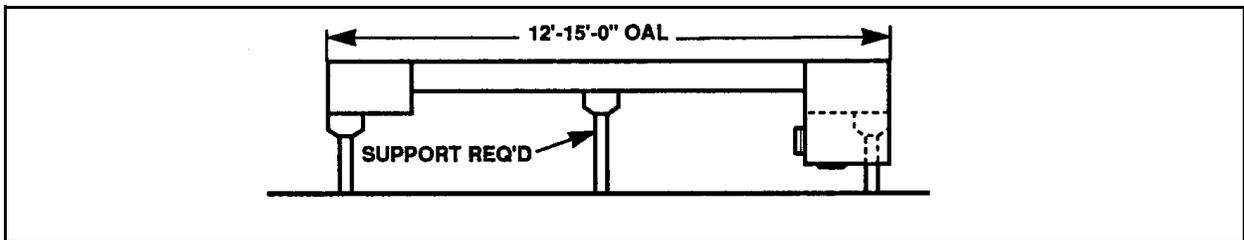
12'-15'-0" OAL Shipped Fully-Assembled Attach Three Supports
